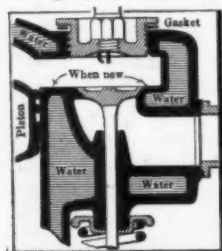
Section of a motor cylinder showing the condition of the valve seats when the motor is new.
